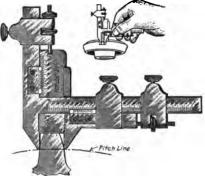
Gear tooth vernier. An almost indispensible tool if much gear work is done.
